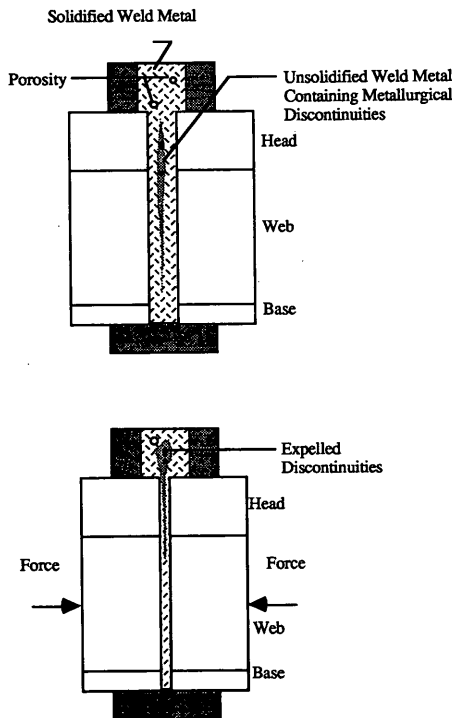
Modified thermite rail welding procedure showing the application of force while the filler metal is liquid and partially solidified.
